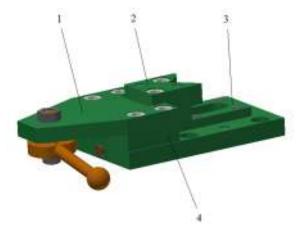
Subassembly for fixing the blank: 1 – guiding; 2 – prism; 3 – backing plate; 4 – mobile jaw.
